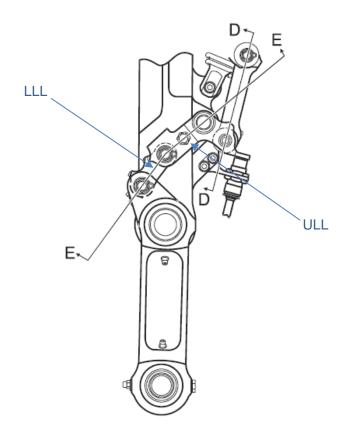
Drag Strut Assembly – locking mechanizm of the Lower Lock Link and Upper Lock Link (LLL and ULL pins are not in the same plane) [source: CMM P/N 47300]
